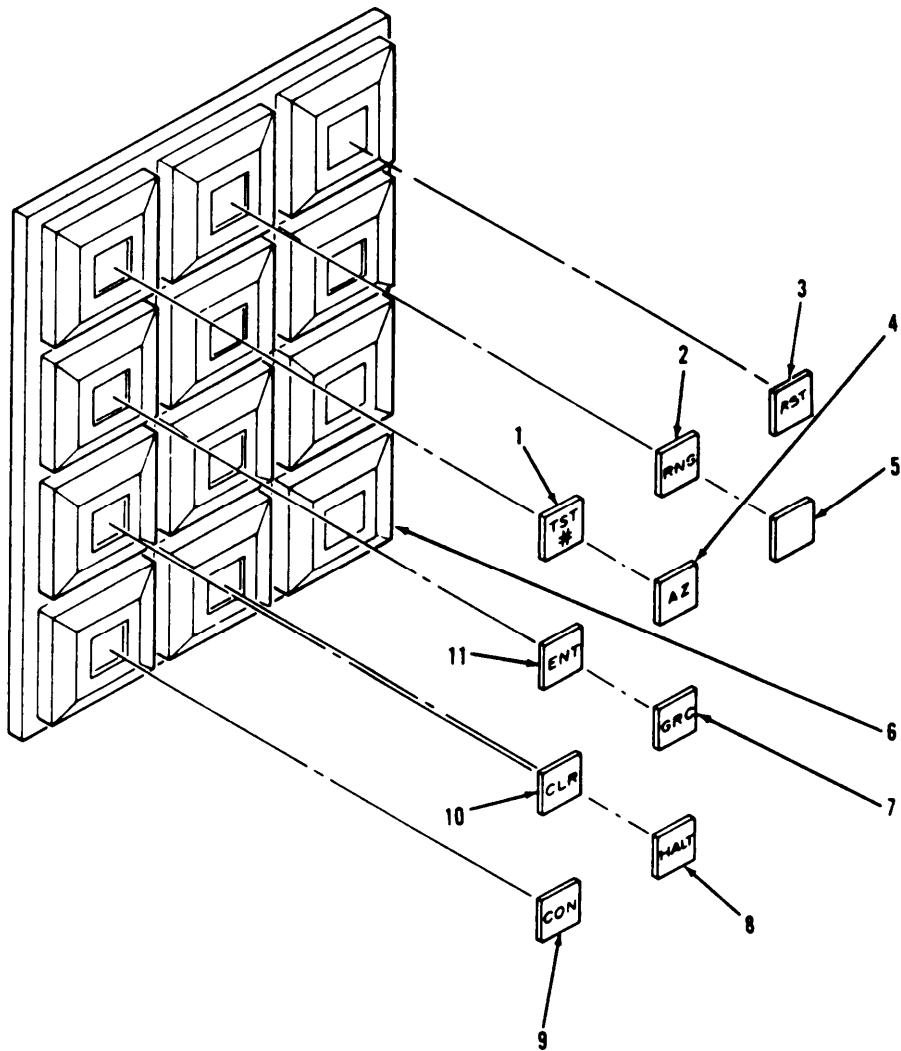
KEYBOARD ASSY COMPONENT PARTS
